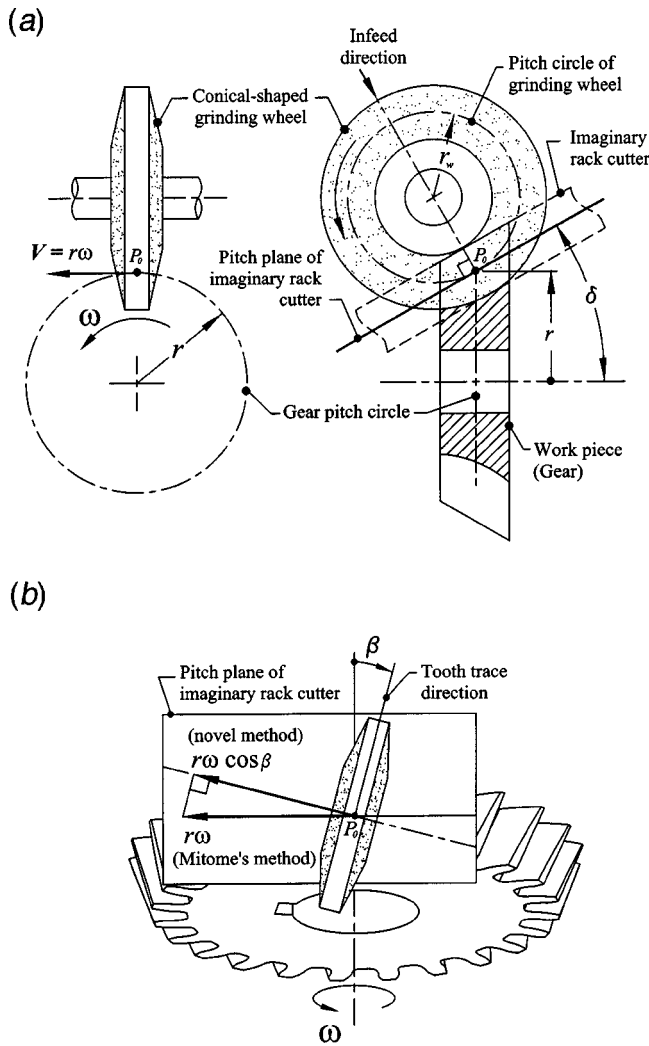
Infeed grinding mechanism for concave beveloid gears
